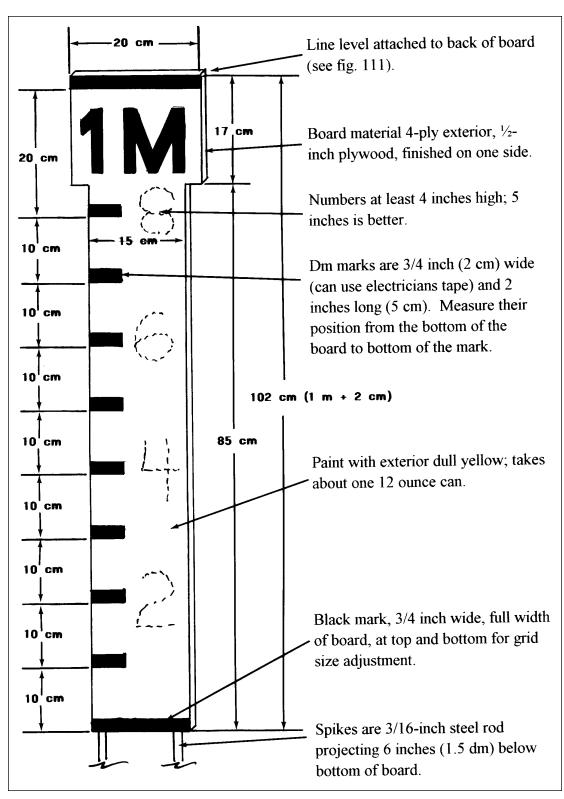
Construction details of a 1-m-tall meter board. The same measurements are used for the 1-m-tall folding board and for the 2-m folding board.
